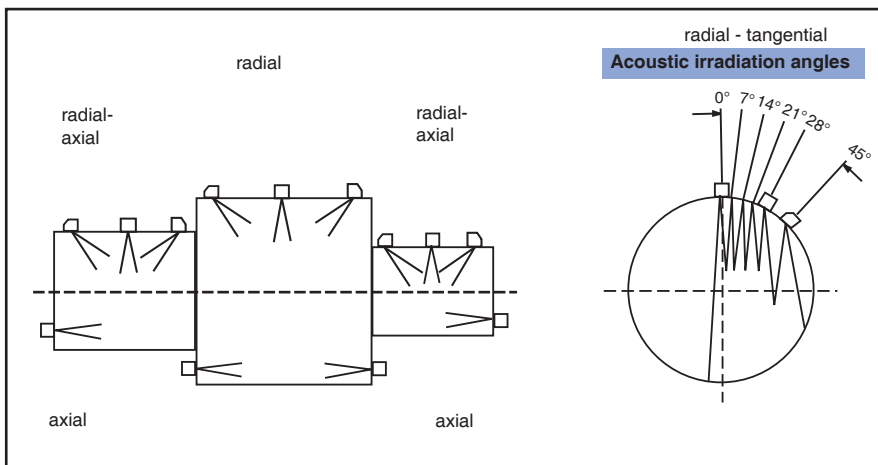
Ultrasonic inspection of integrally forged gear element.
